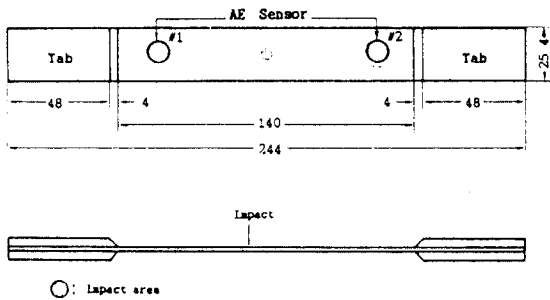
Shape of impact tensile specimen, All dimension in mm
